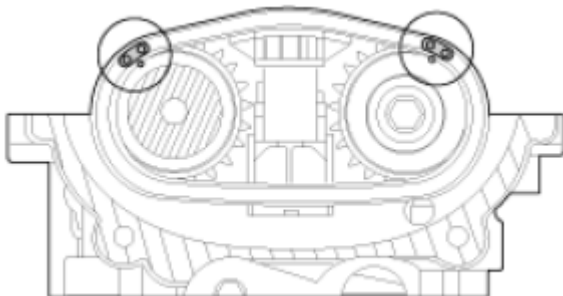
Identifying RH Camshaft Chain Timing Mark
